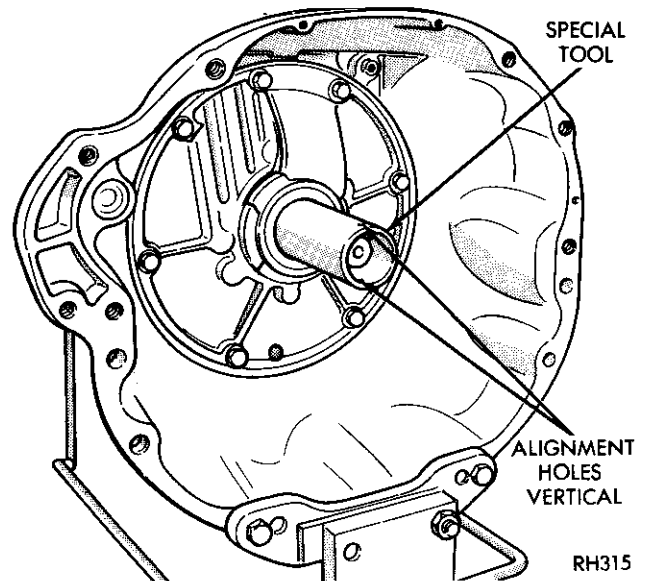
Aligning Oil Pump Inner Gear Lugs—Typical
